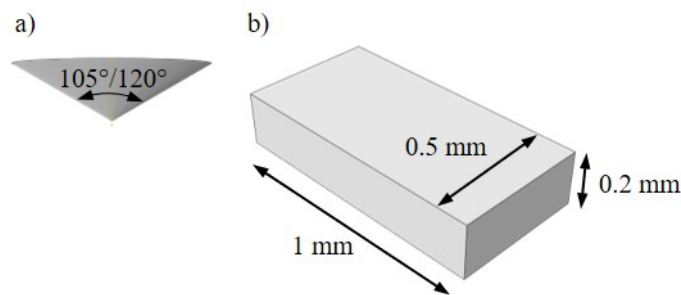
Model dimensions of rigid tool a) and deformable workpiece b) of the 3D scratch model [107]
